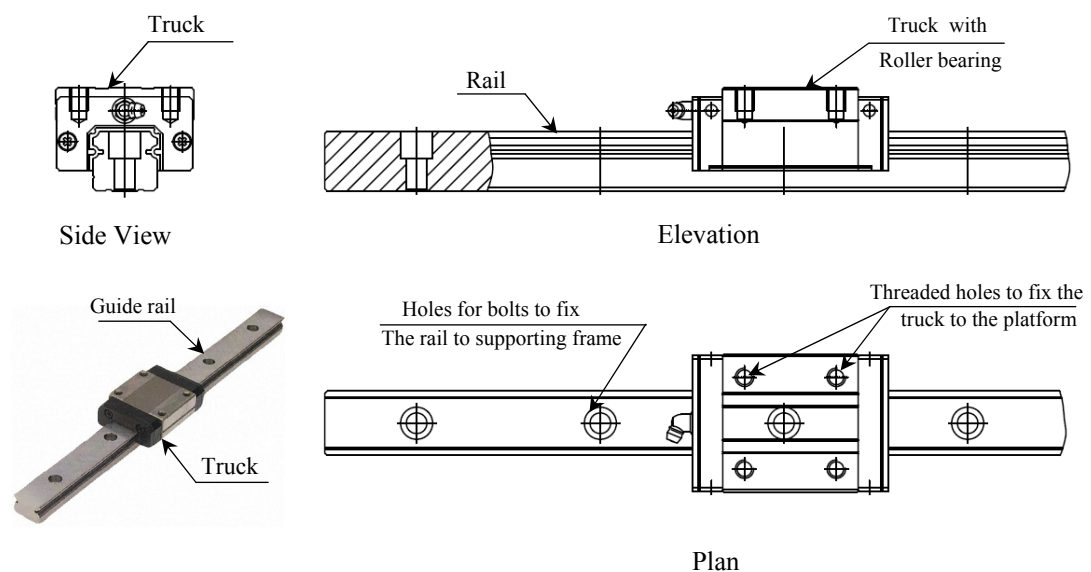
Details of LAH30AN/ANZ linear Guide Bearings
